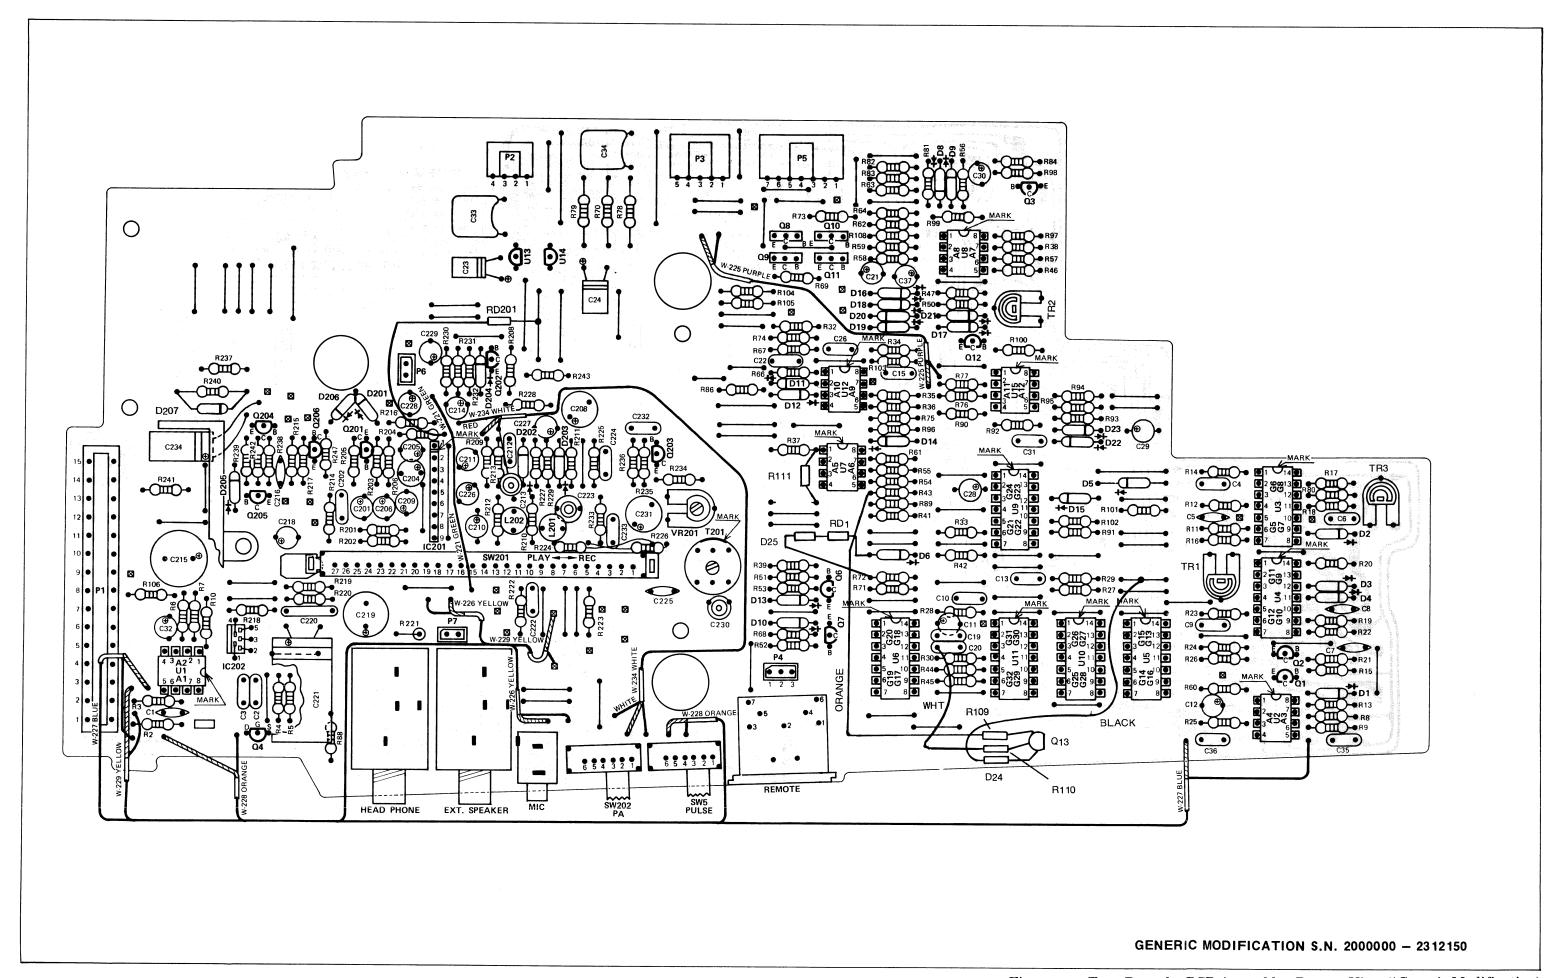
Tape Recorder PCB Assembly - Bottom View (*Generic Modification)
